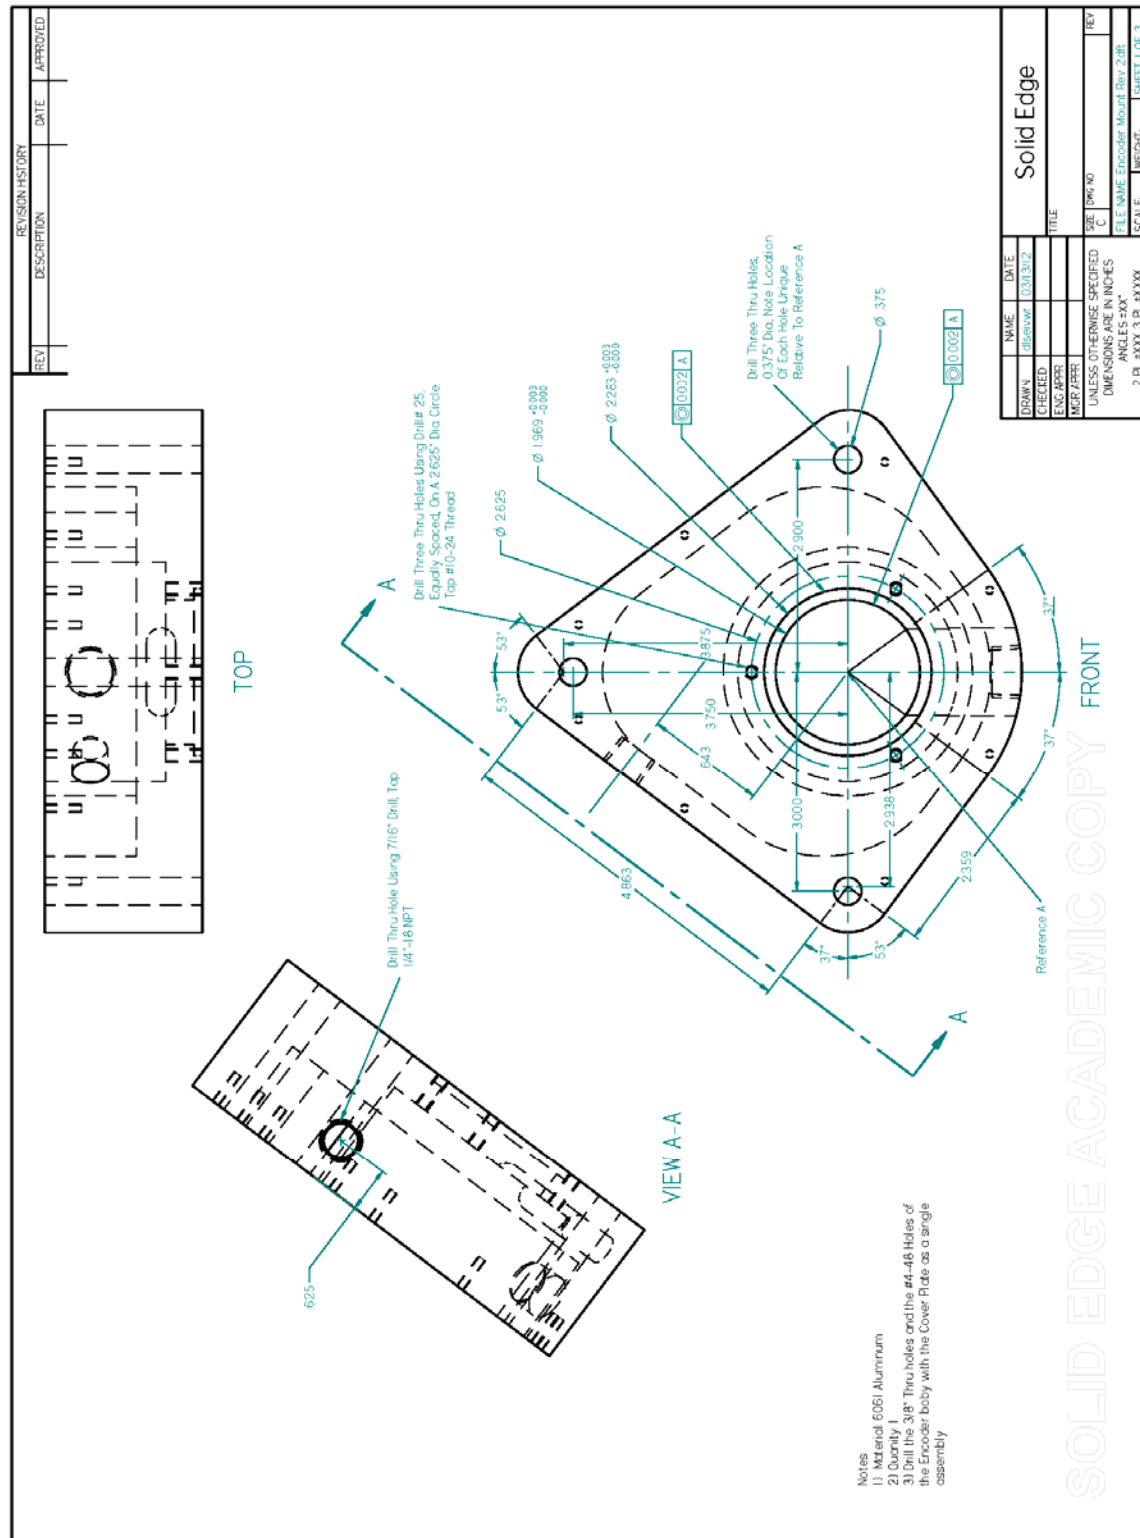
Engineering Drawing of Optical Encoder Mount Front
